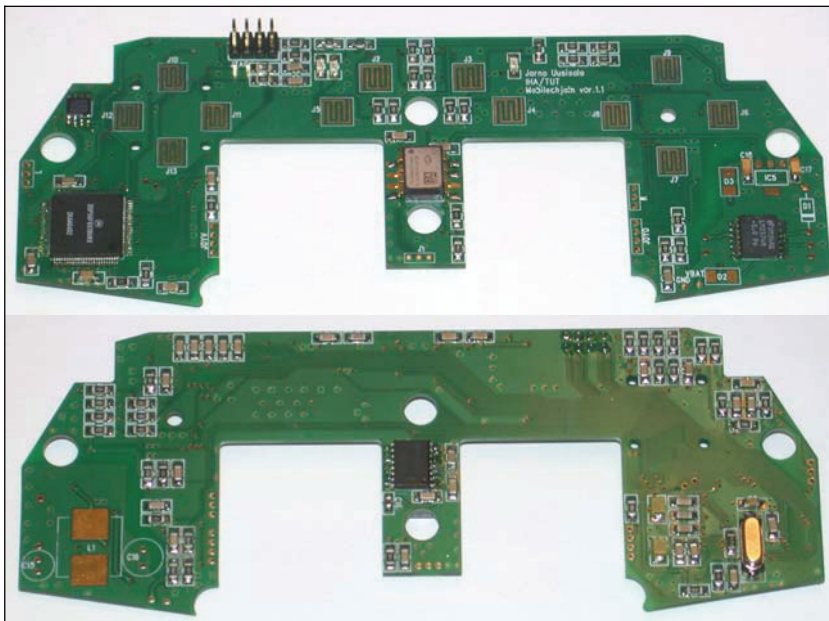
Printed board assembly of the implemented remote control. Top side of the board is shown in the upper part and bottom side in the lower part of the figure.
